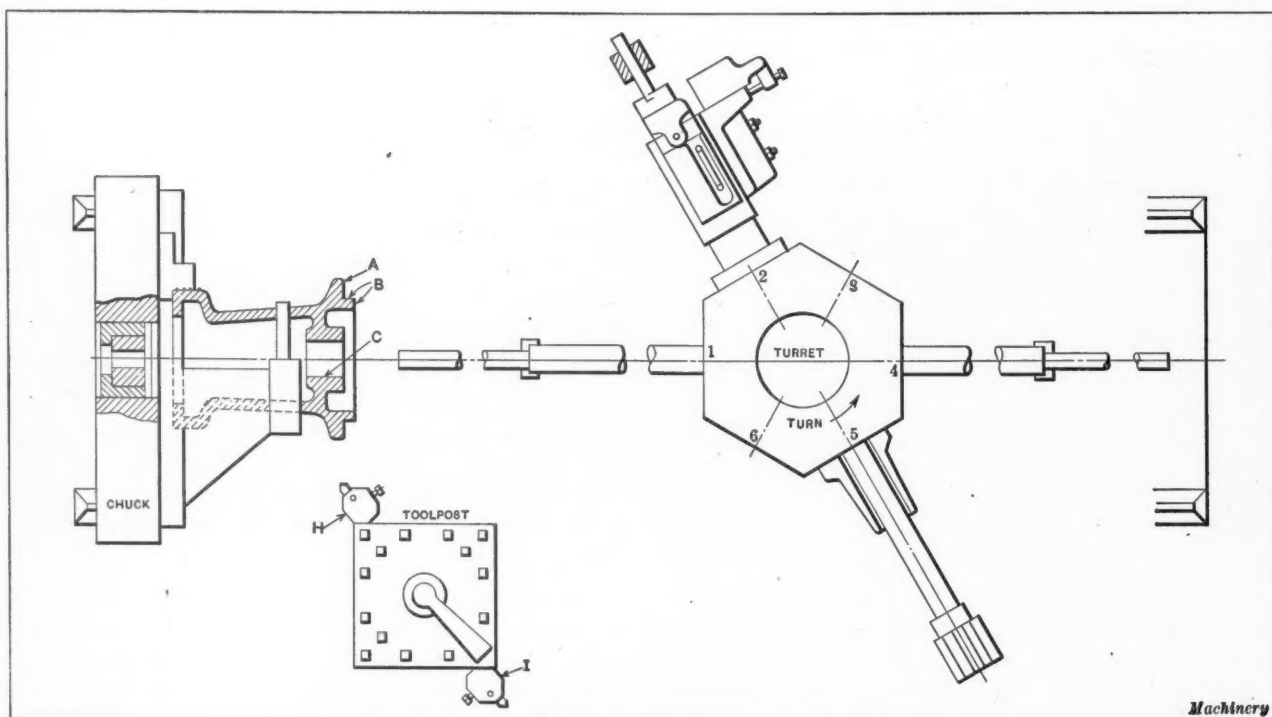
Tooling Equipment for First Operation on Axle Housing shown in Fig. 1
